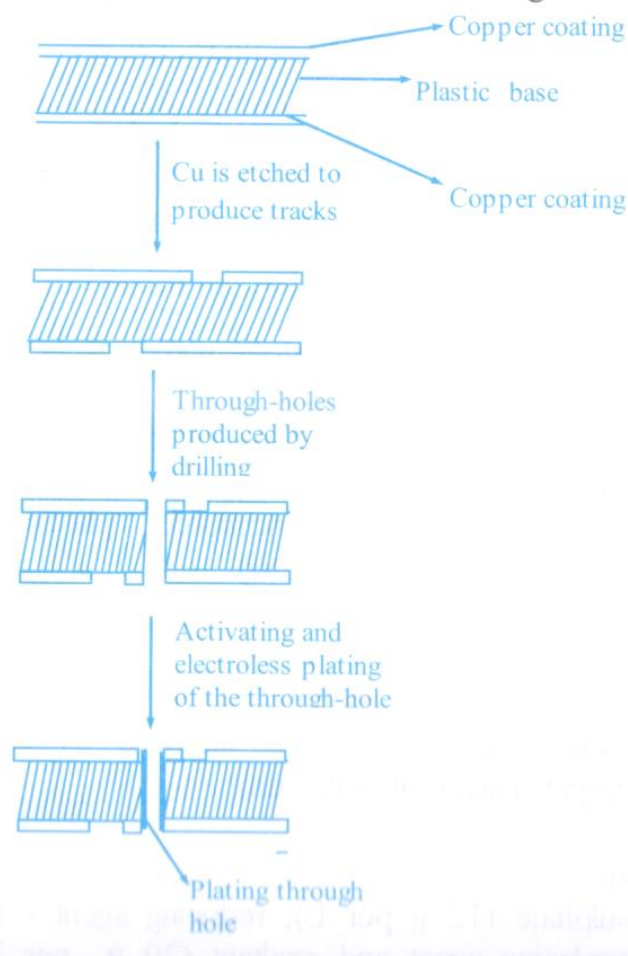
Steps in subtractive technique of plating-through in the manufacture of double sided PCB. Copper clad tracks on each side of the plastic board are connected through-hole.
